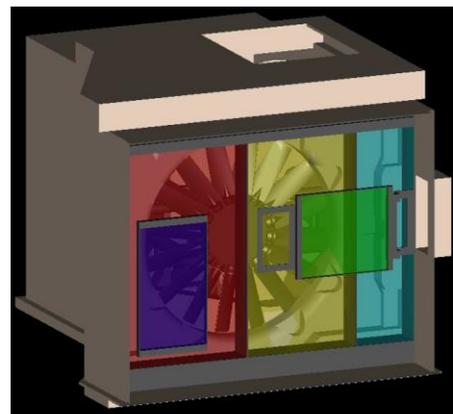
CAD image of the cooling package and fan mounted within the engine compartment mock-up.
